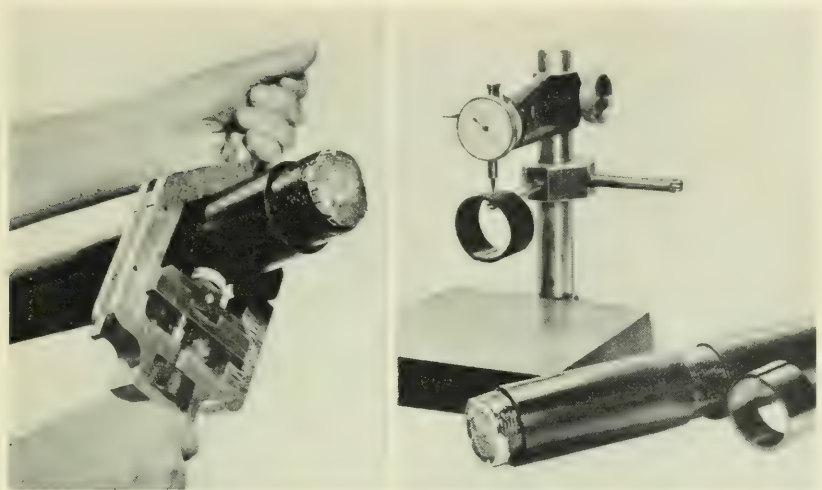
(Left) Removing test strip from end of cable; (right) performing micrometer measurements on test strip.
